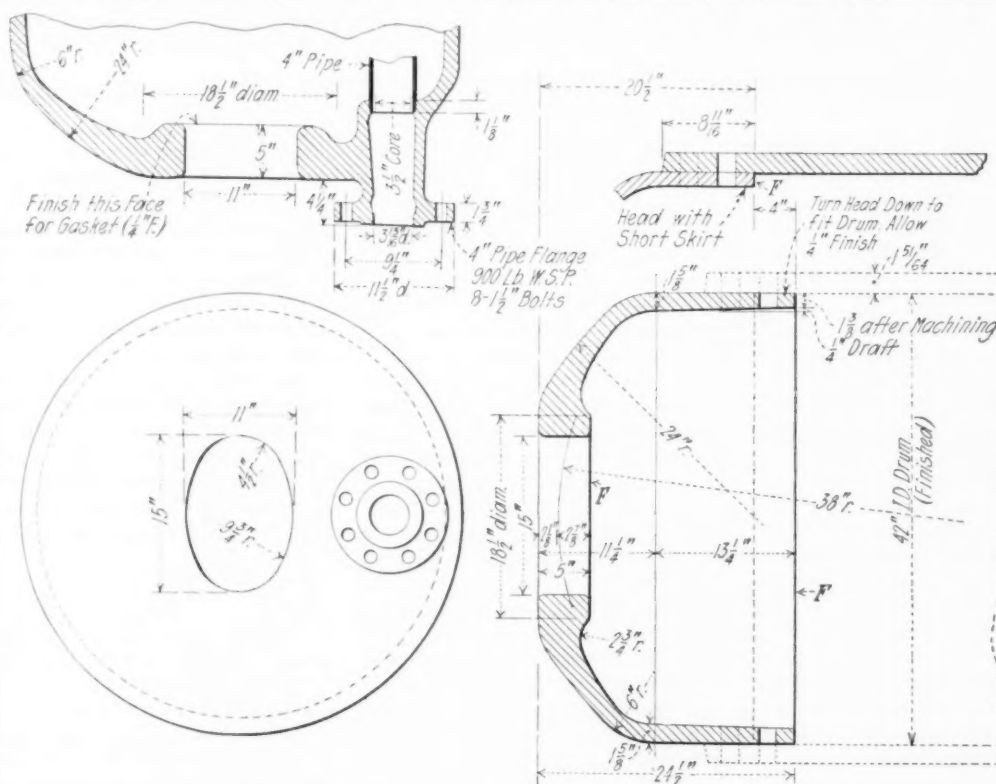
PROPOSED CAST-STEEL HEAD FOR 42-IN.-DIAM. STEAM DRUM FOR 750 LB. PRESSURE
